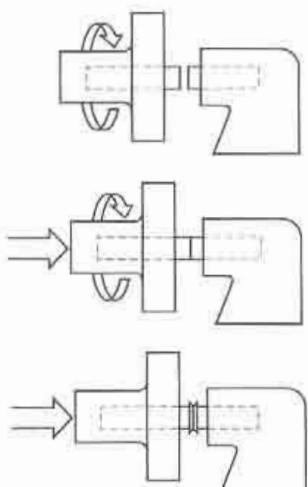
Schematic representation of the various steps in inertia welding. The rotating part is now attached to a large flywheel.
